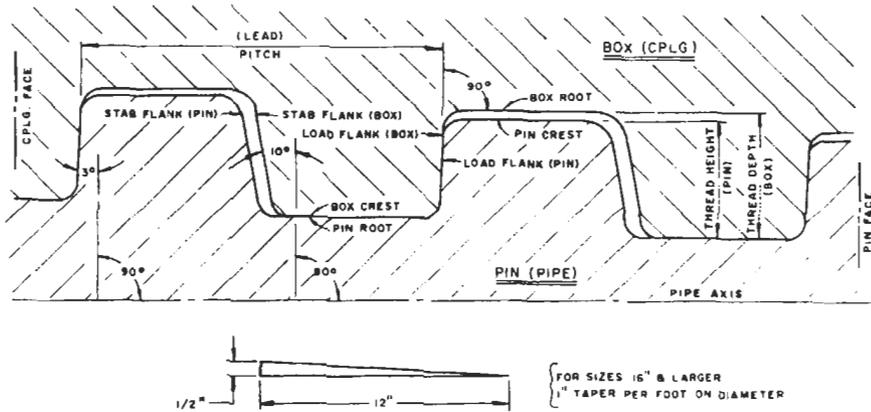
Buttress thread configuration for 16-in. outside diameter and larger casing. (From Ref. [54].)
